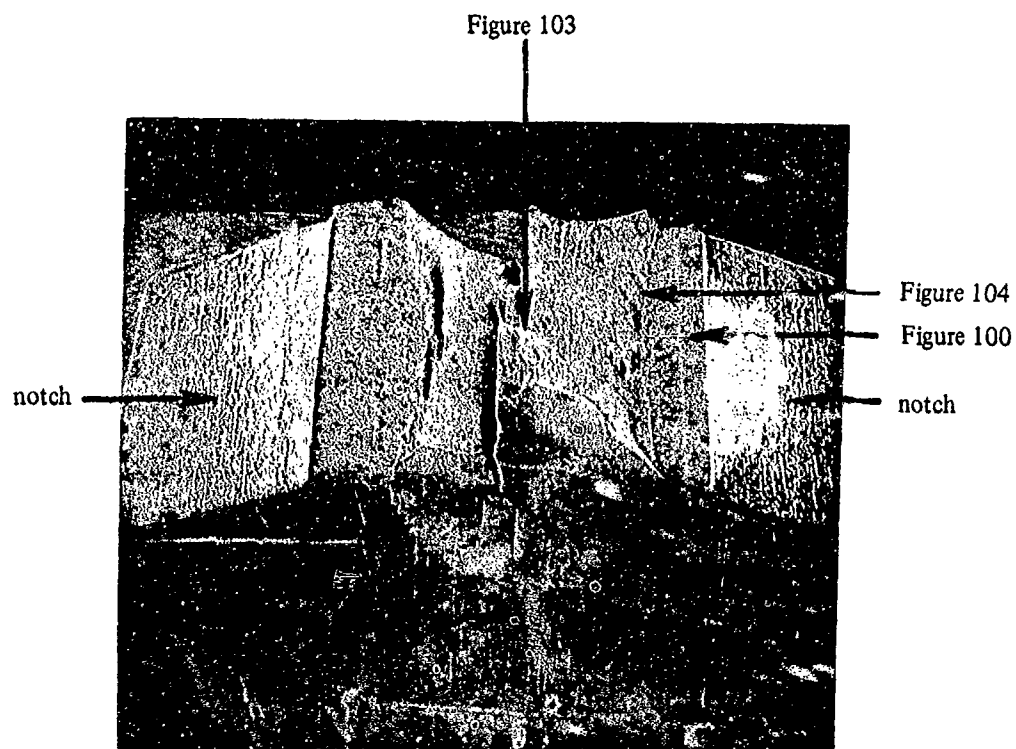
Fracture surface of temper-embrittled HY-130 fatigue specimen, 8x.
